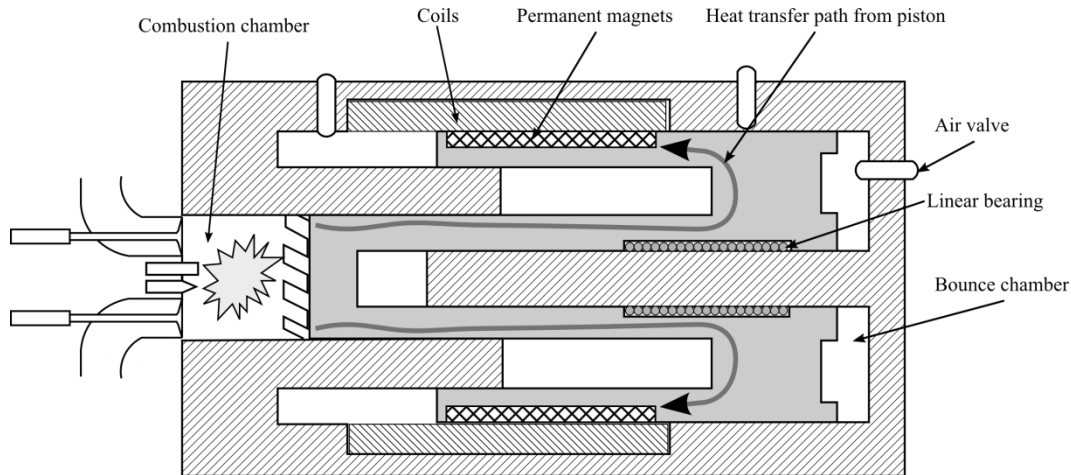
Specially designed piston to dissipate heat quickly while reducing the temperature rise on the permanent magnets and coils [64].
